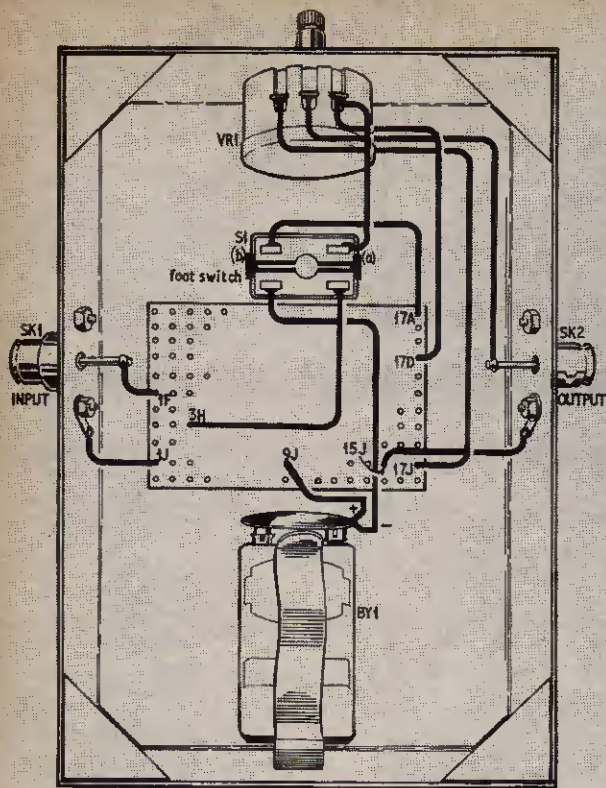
Wiring details of the unit. The full details of the centre component board are shown in Fig 2
